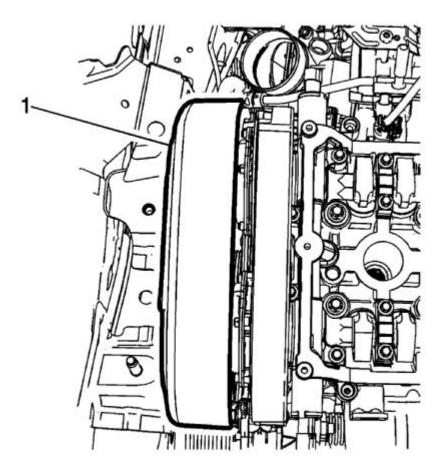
Upper Timing Cover Courtesy of GENERAL MOTORS COMPANY
